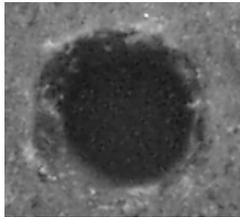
Hole obtained by ECDM in a cutting steel workpiece
